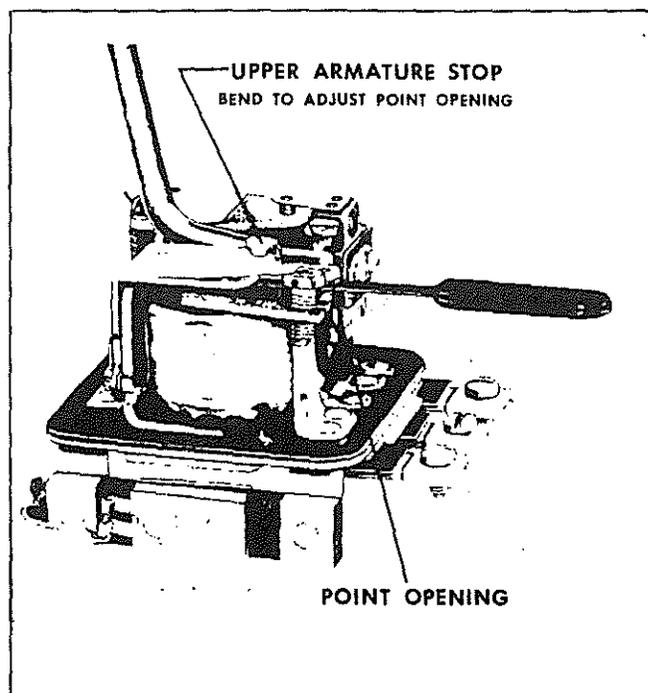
Cutout relay point opening check and adjustment (1118300 and 1118700 series). Battery must be disconnected when this check is made.
